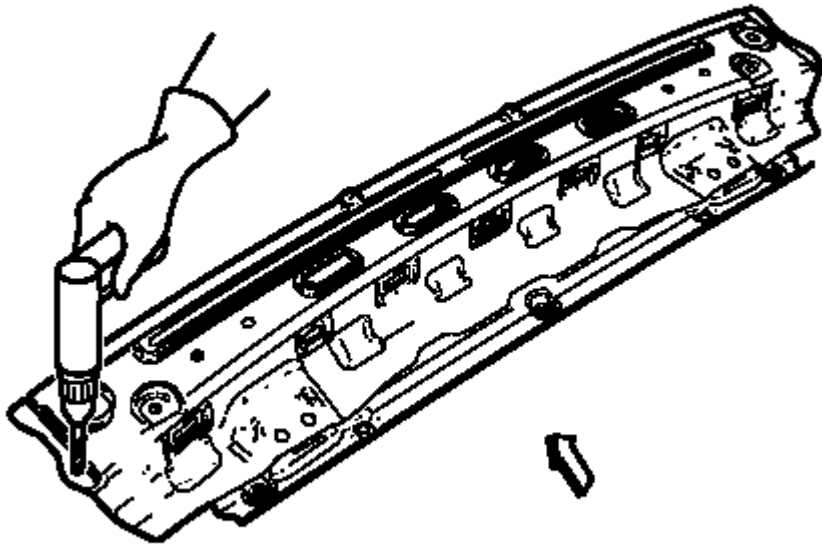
Drill 8 mm (5/16 in) For Plug Welding Along Edges Of Service Panel
